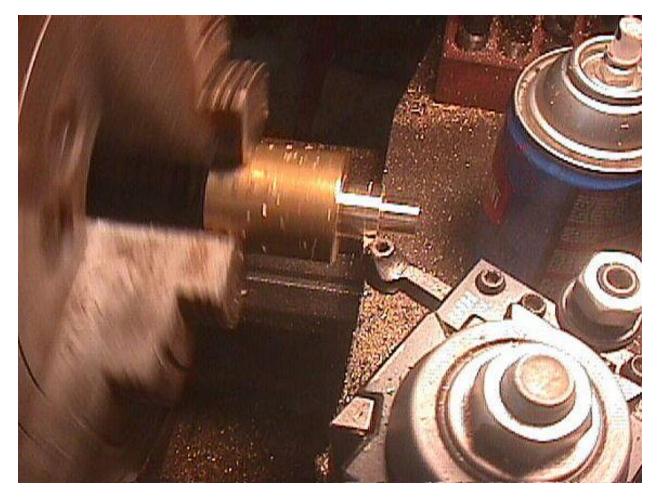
Machining the thumbscrews to hold clamshell to sides
